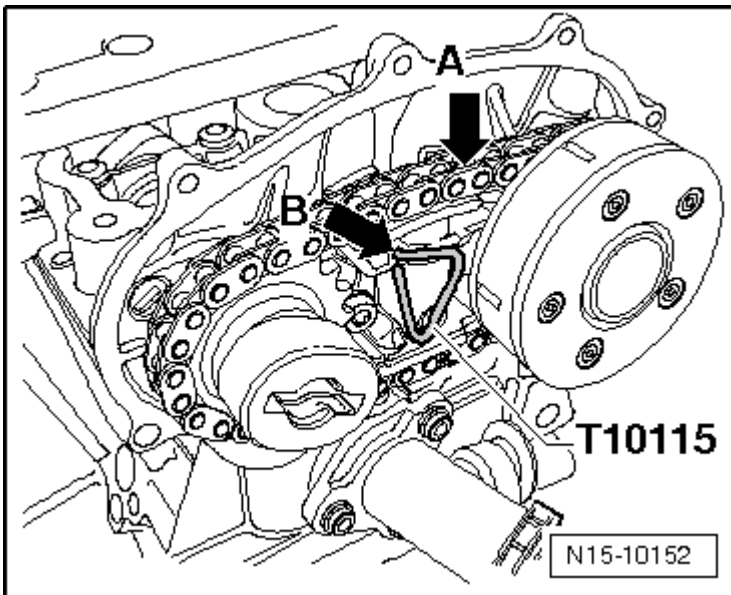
Identifying Chain Tensioner Compressed And Secured Using Locking Pin T10115
